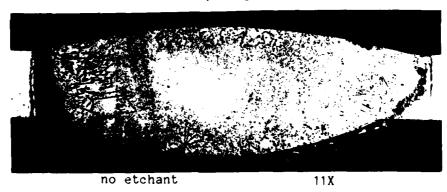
Weld made with no preweld heat treatment, DCEN, ER4043
